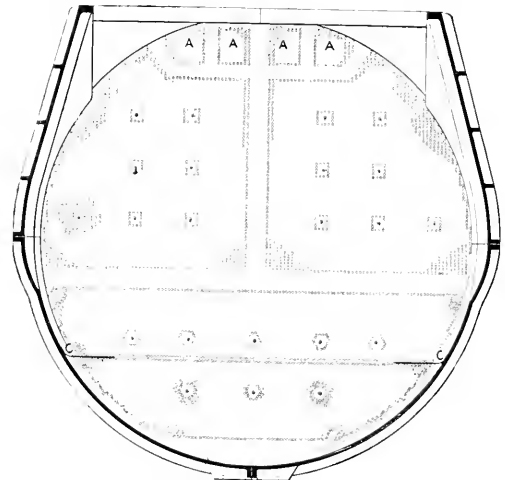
SHOWING ARRANGEMENT OF TUBES AND STEAM PASSAGES
